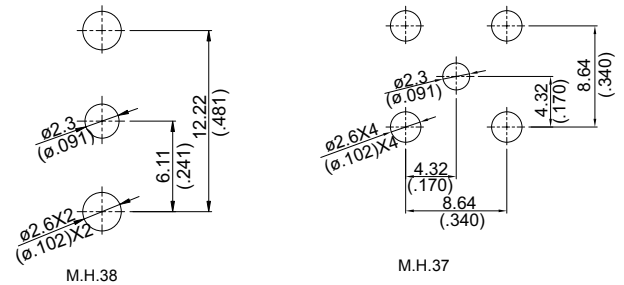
2-hole flange Fig. 5-2:square flange
